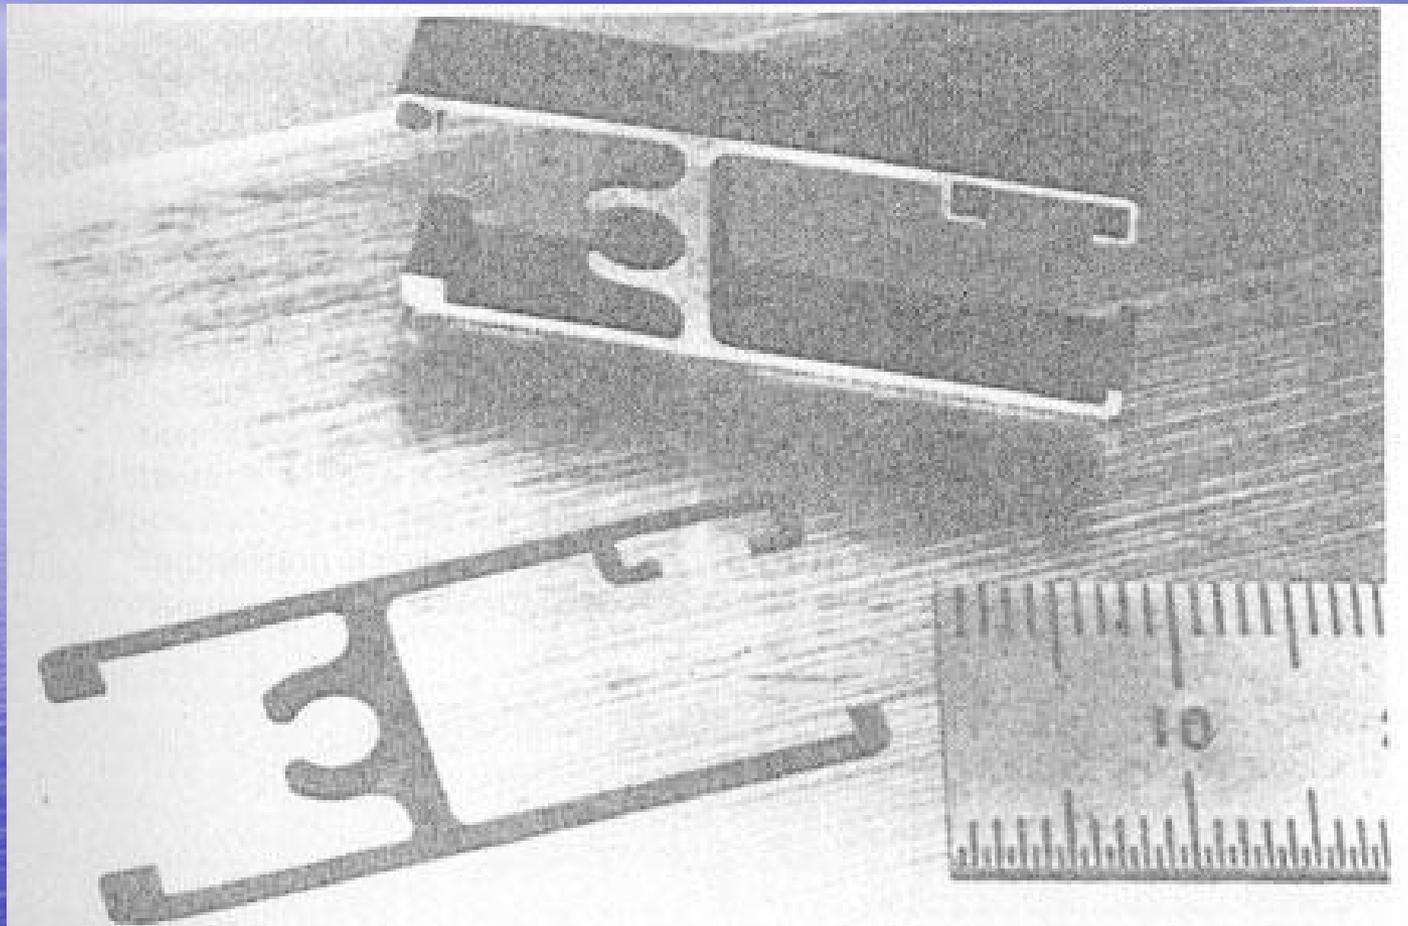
Aluminum extrusion die. Five-millimeter thick hardened steel shape is cut in 2.7 hr by wire-EDM. Surface finish is  $5\text{-}8\ \mu$  (Source: courtesy, Japax/McWilliams Machinery Sales, Bridgeport Machines Division of Textron, Inc., Farmington Hills, Mich.).
